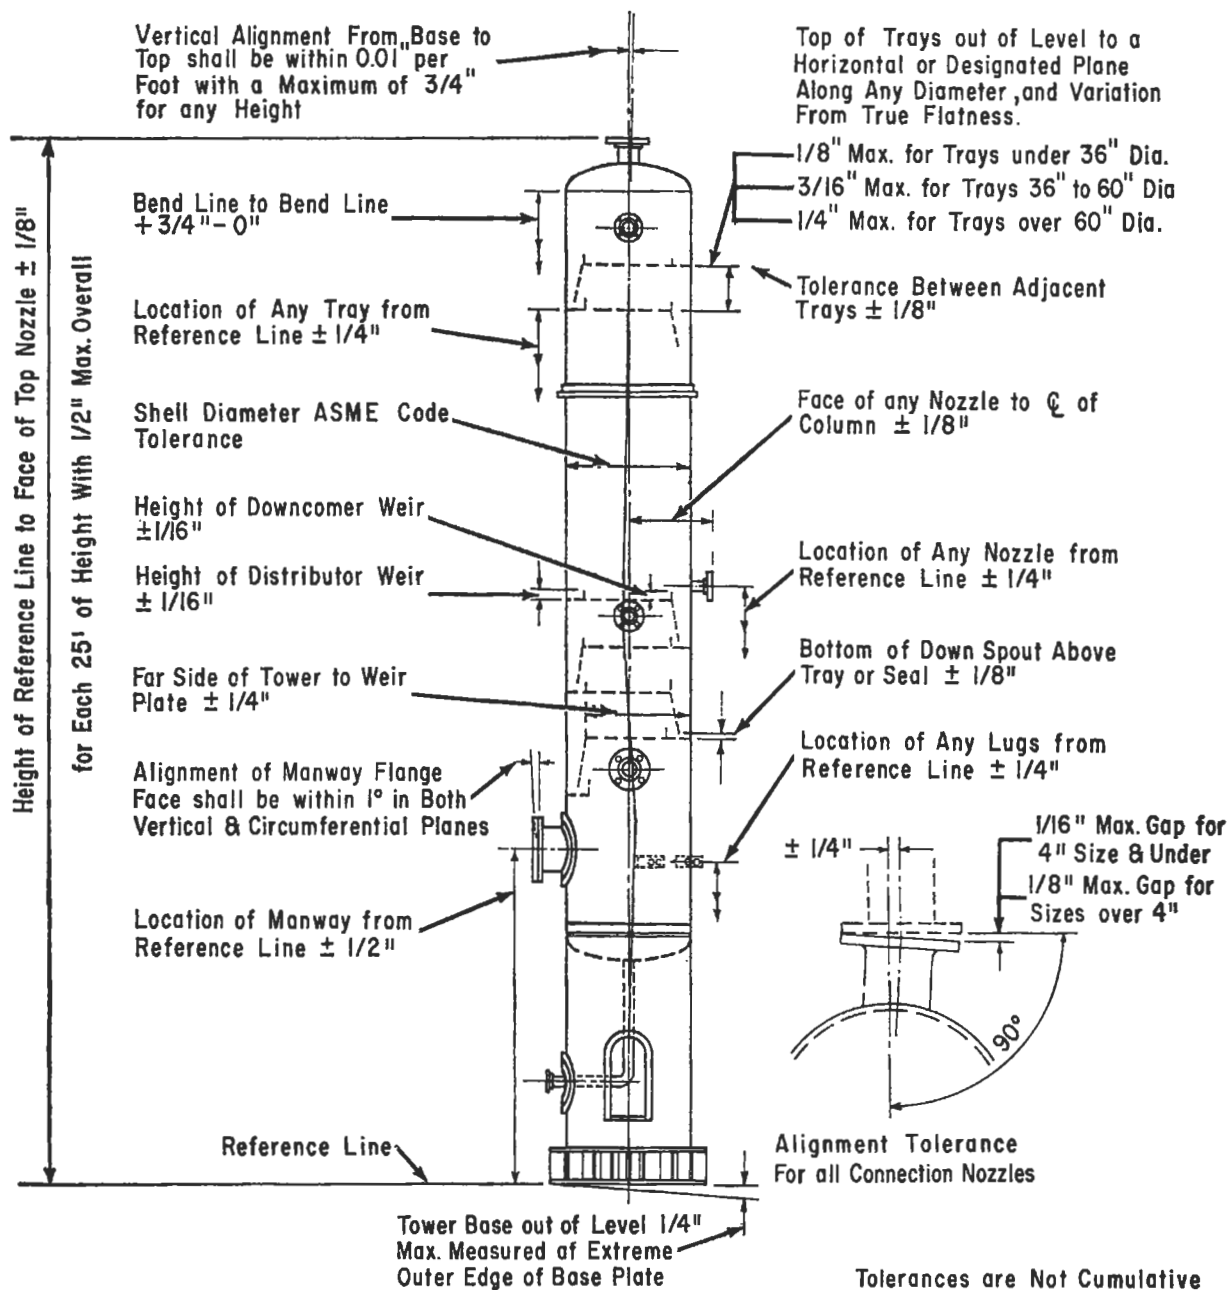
Suggested tolerances for distillation type towers.
